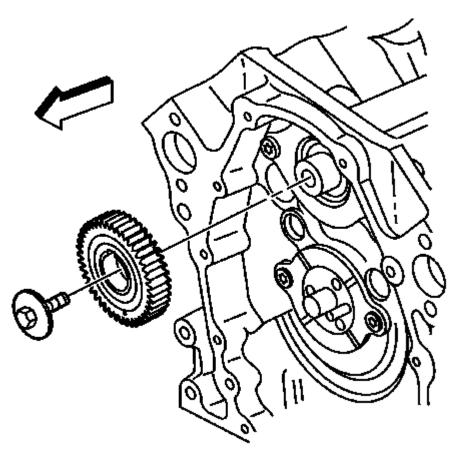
Locating Balance Shaft Driven Gear Courtesy of GENERAL MOTORS CORP.
